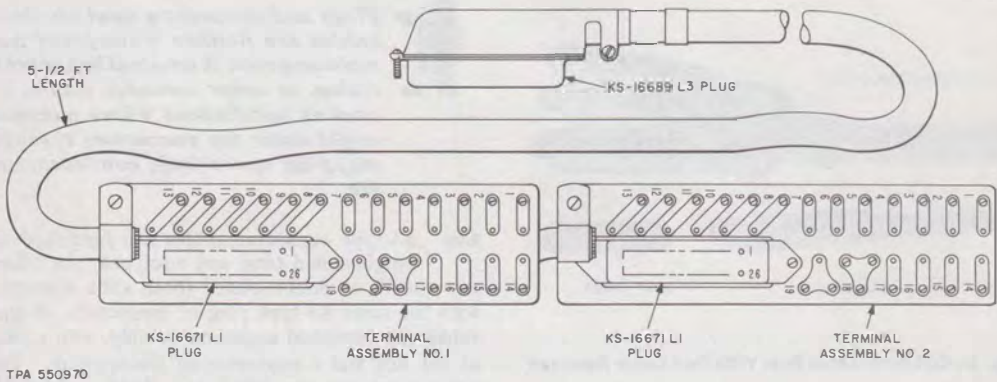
B25C Connector Cable—View of Terminal Strip, Local Wiring Side
